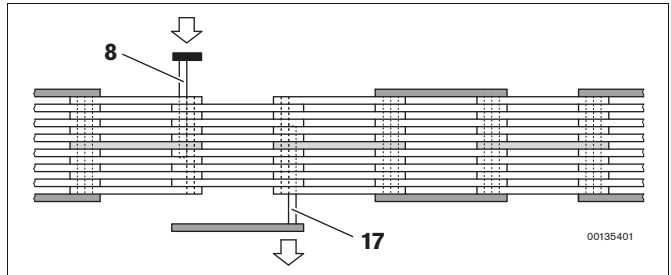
Inserting the lock pivot, removing the axle pivot with connected welding plate
